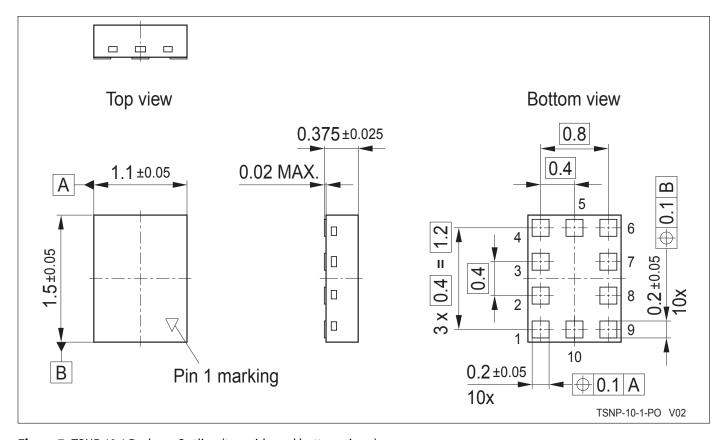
TSNP-10-1 Package Outline (top, side and bottom views)
